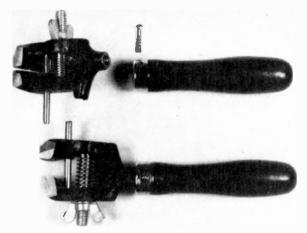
PIN VISE is converted into PC board holder by drilling and tapping.
